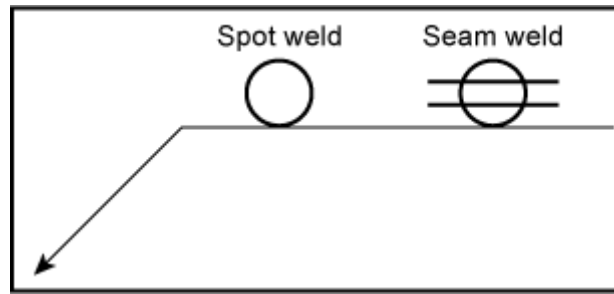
Spot welding symbols. (The welding institute n.d.)
